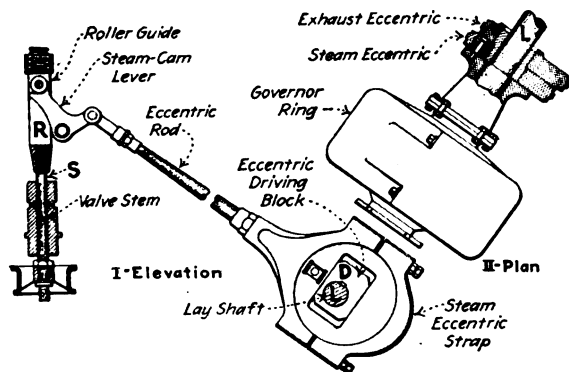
High-pressure steam-valve gear of "Lentz" engine. (Erie City Iron Works.)
